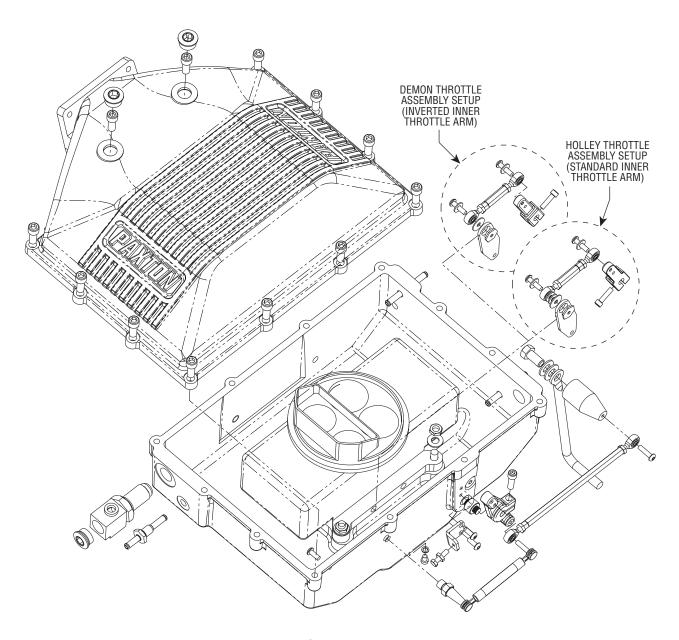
I / Carburetor enclosure (64-68 Mustang shown)
